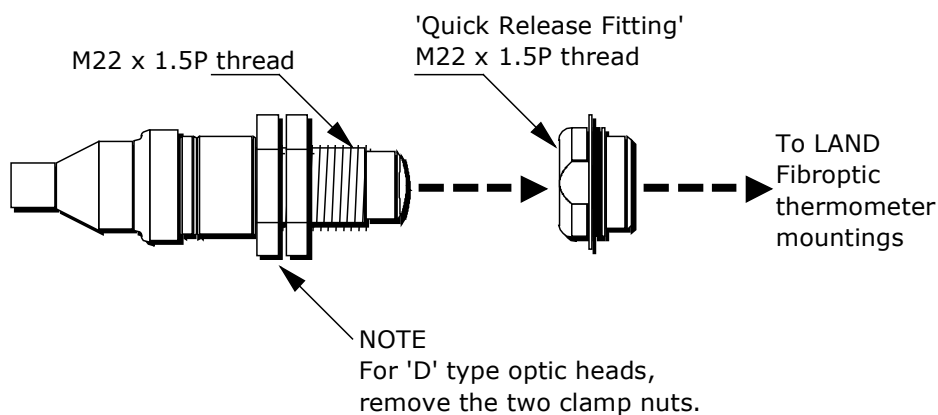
Mounting the optic head into Land Fibroptic thermometer mountings
